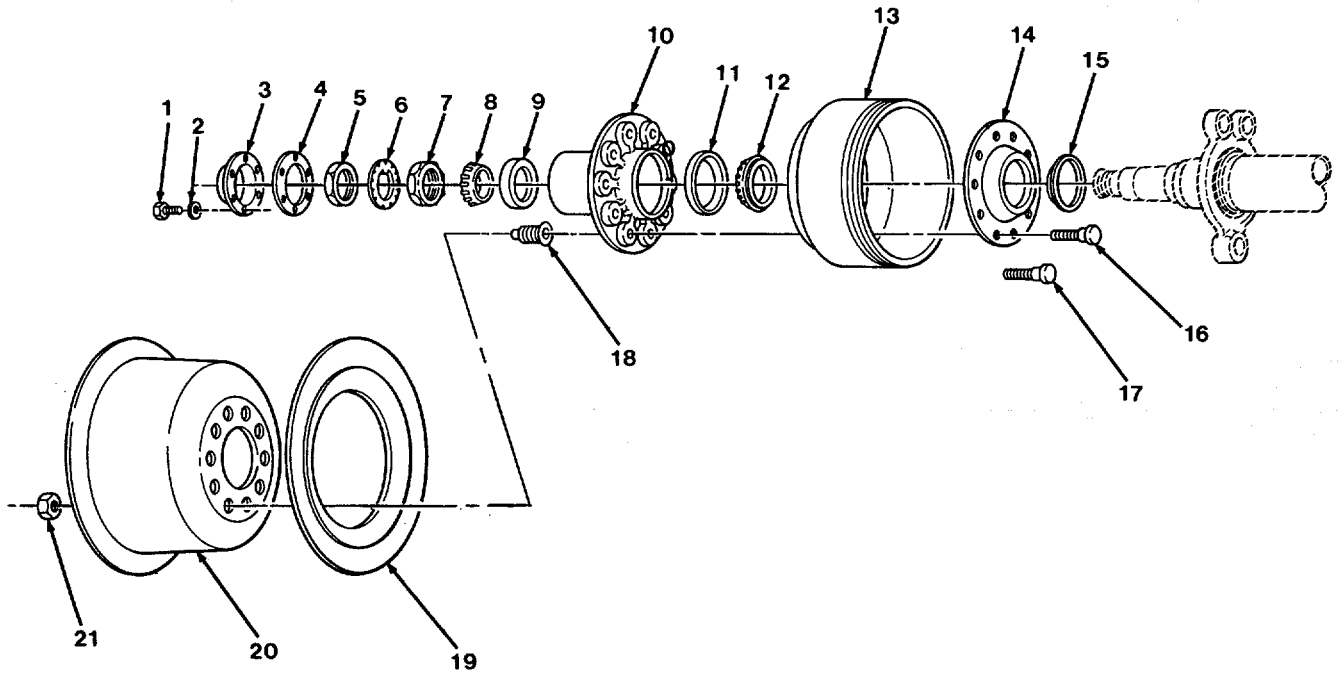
WHEELS, SEALS, BEARINGS AND DRUMS .
